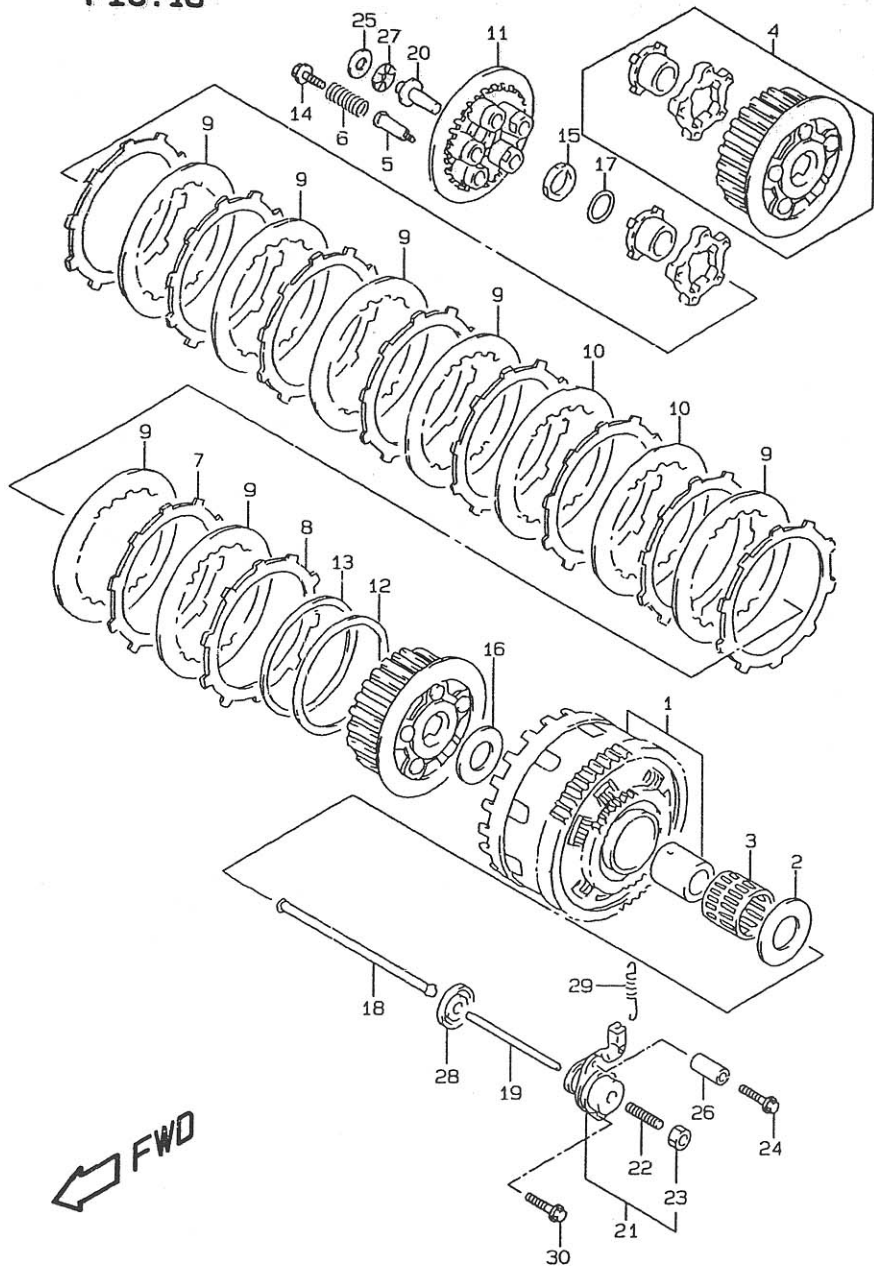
(D- 7) CLUTCH (MODEL V/W)
